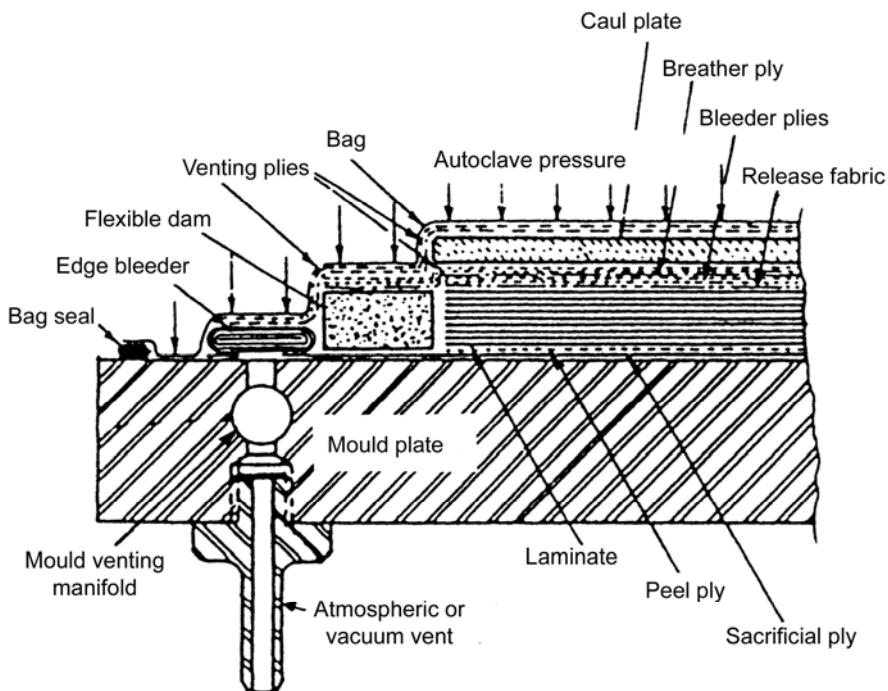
Autoclave moulding method, with vertical bleeder
